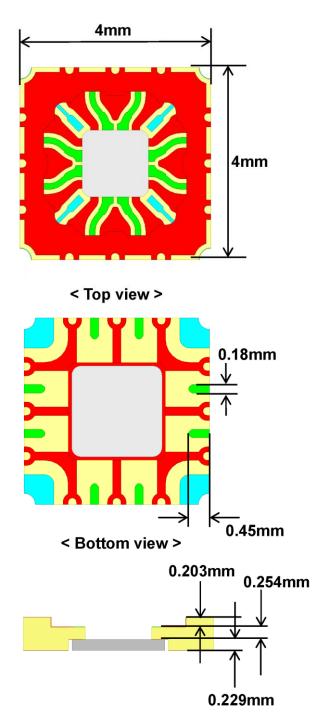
CQFN 24-Pin Package Drawing (All Dimensions in mm)
